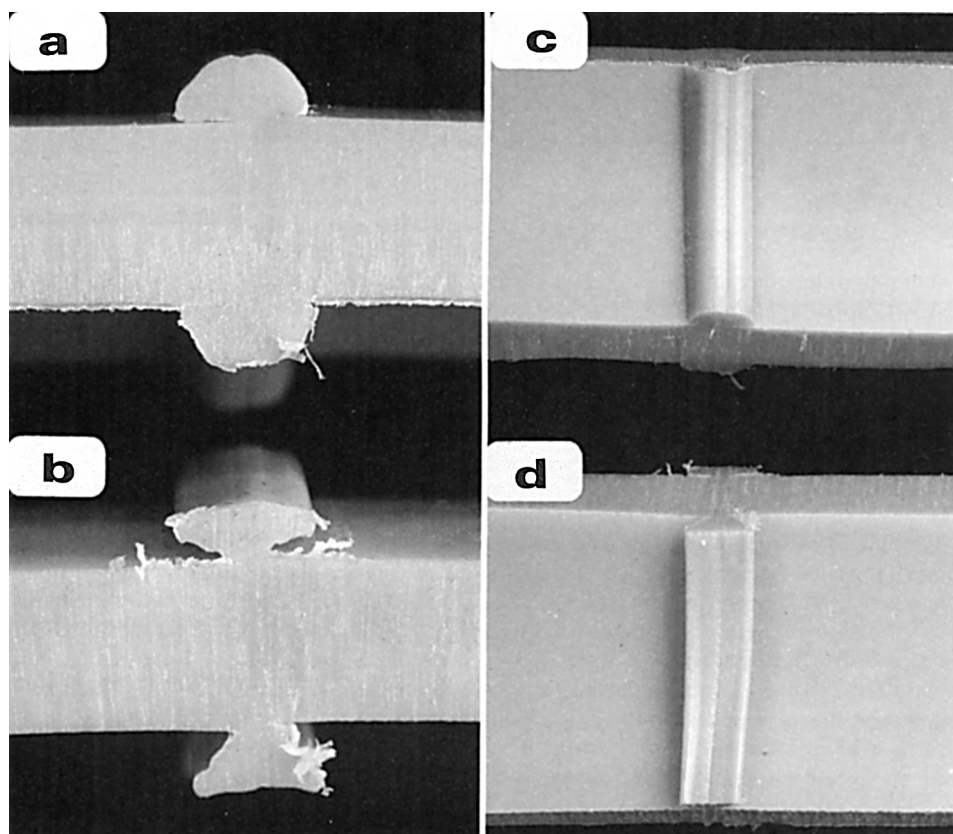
Shape of beads: (a,c) 1.61 MPa; (b,d) 0.31 MPa. (a) and (b) are sideview; (c) and (d) are the view of the inside surface of the weld joint.
